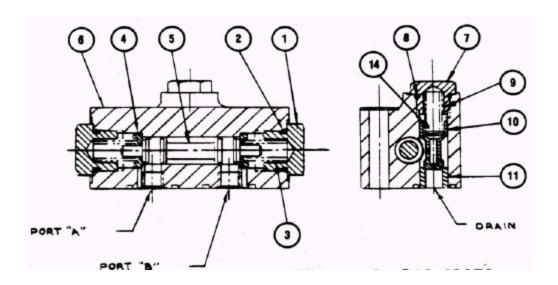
ASSEMBLY, SHUTTLE VALVE
